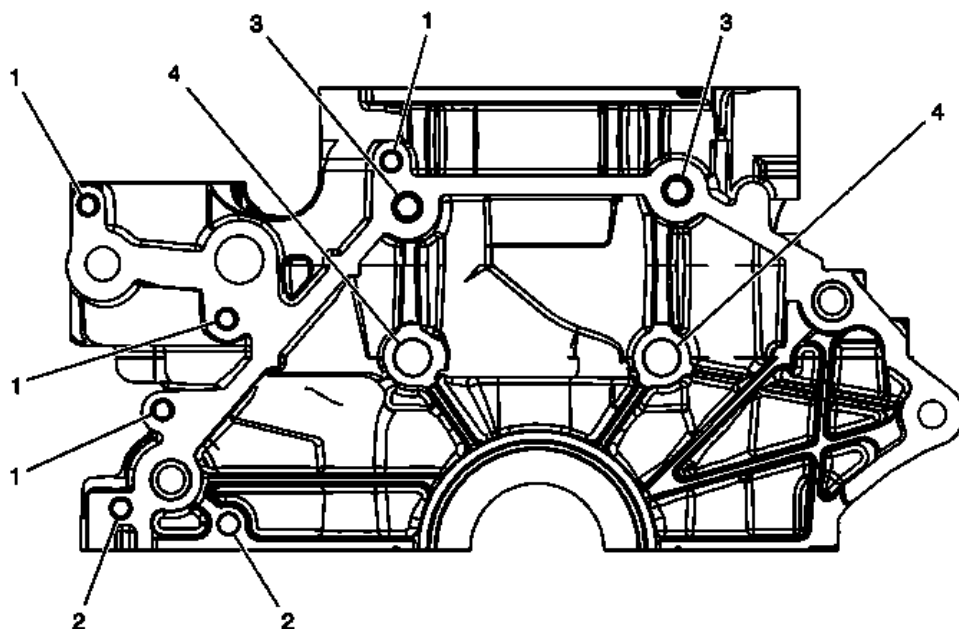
Identifying Bolt Size & Locations On Engine Block - Back View
